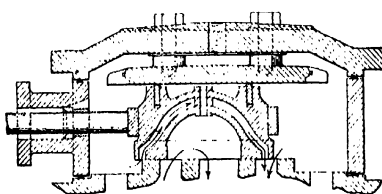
Allen-Richardson Balanced Slide Valve — Double-ported.
